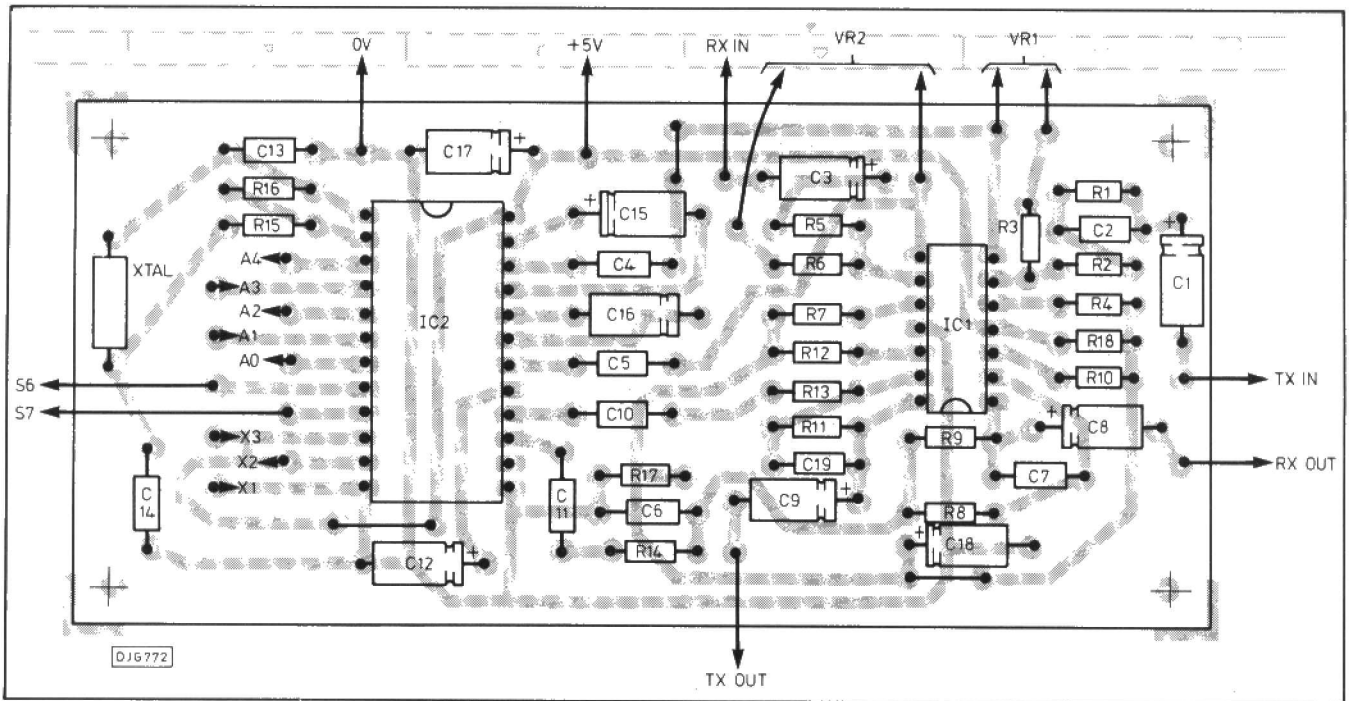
Printed circuit board details for the 32-channel voice scrambler module.
